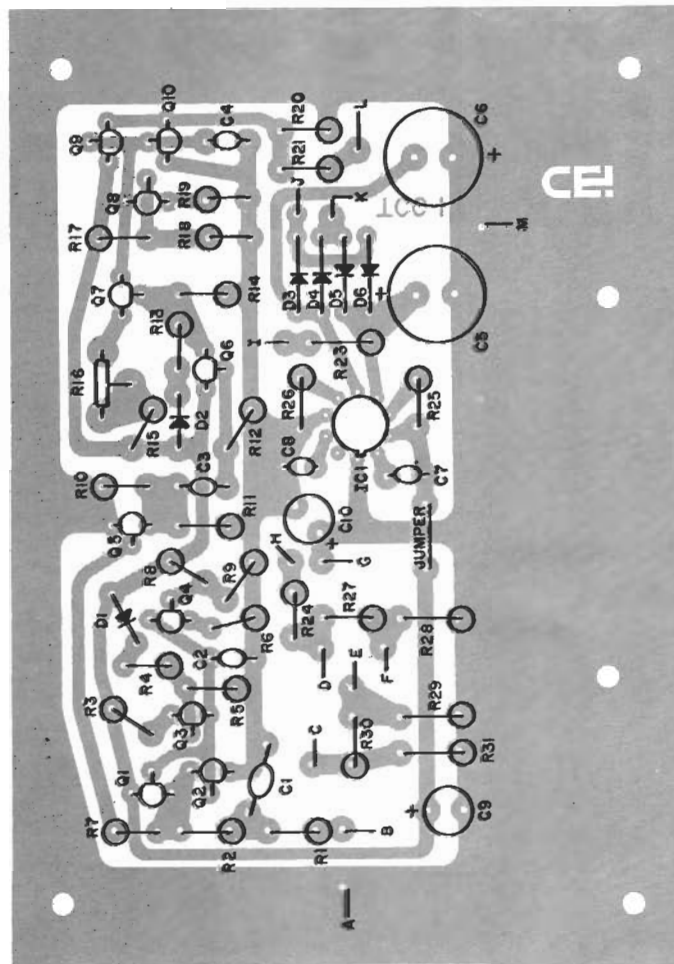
X-RAY VIEW of the PC board showing the location of all components on the "top" side of the board. The holes identified by letters are for the connecting leads to the switches and control on the front panel.
